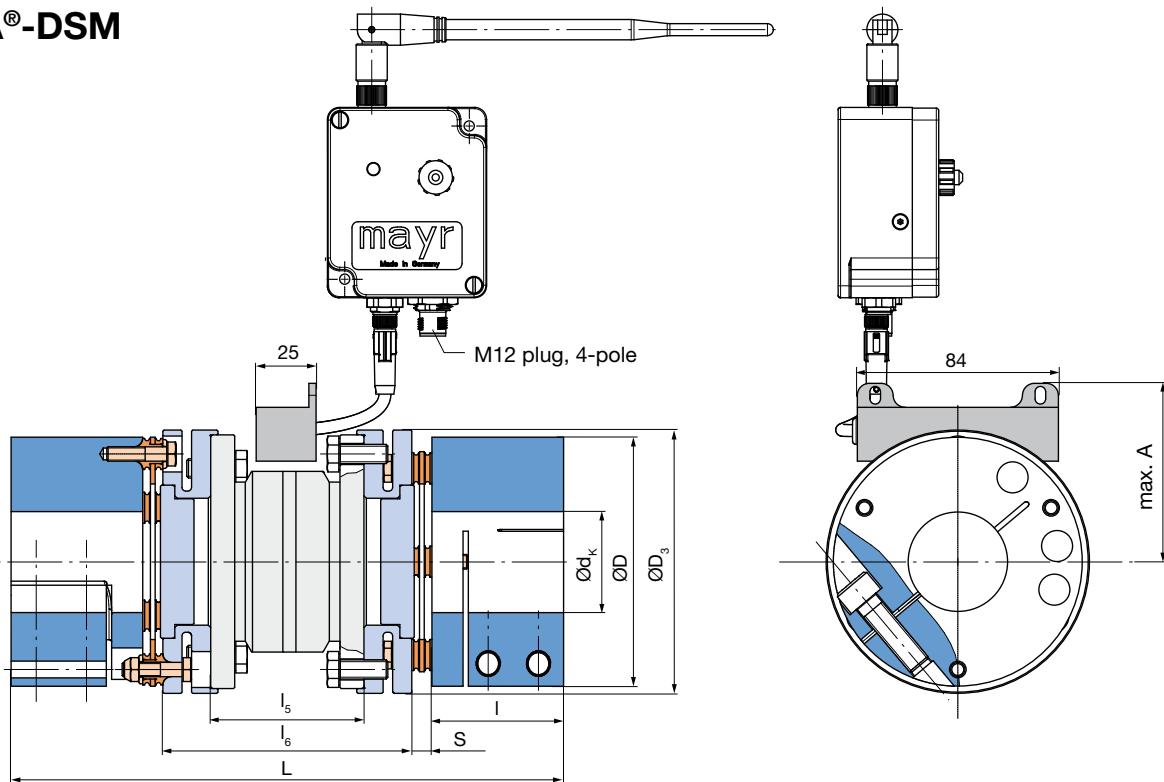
Type 971.555 (for other mounting variants, see pages 28 – 44)
